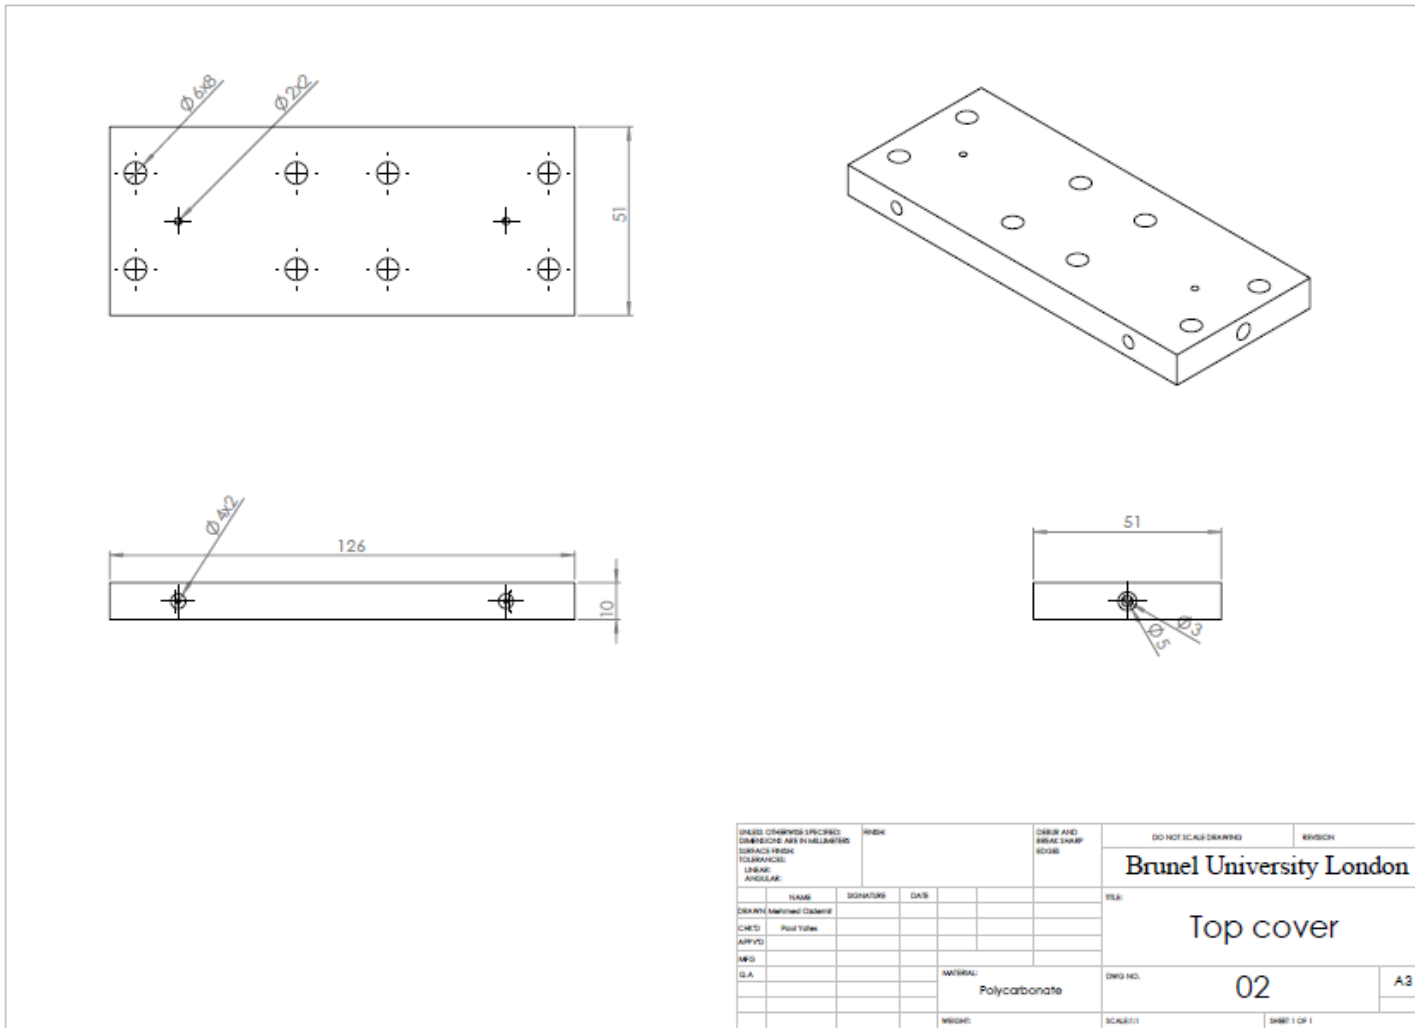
Engineering drawing of the polycarbonate top cover, dimensions in mm.
